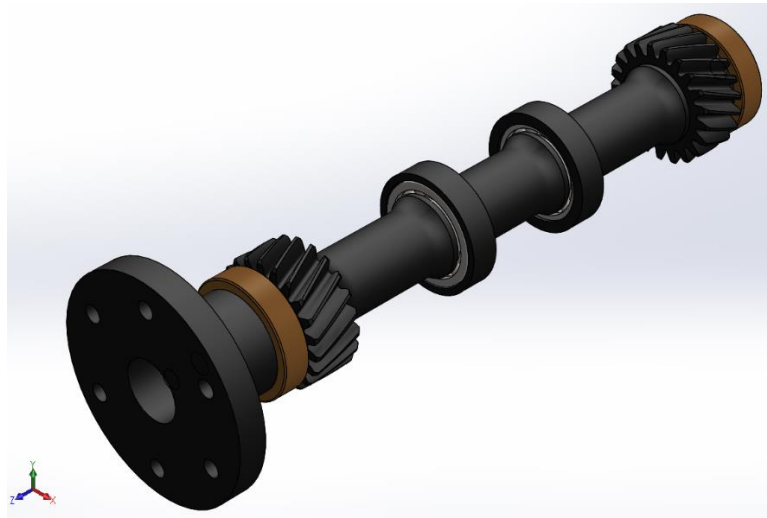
Drawing made with the CAD software, showing the final structure that planetary gear must have
